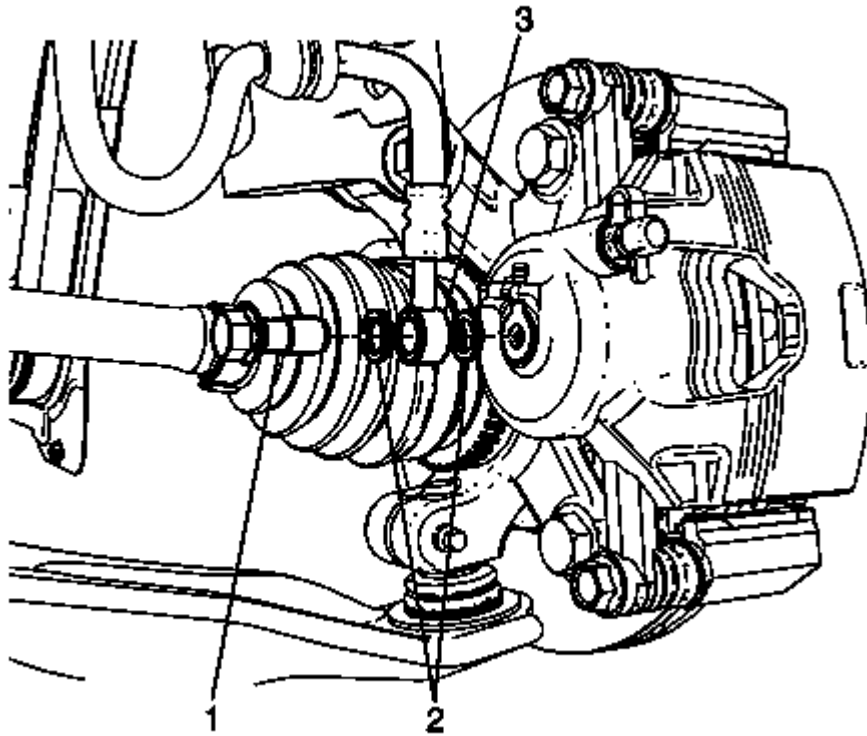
Copper Brake Hose Sealing Washers And Brake Hose
